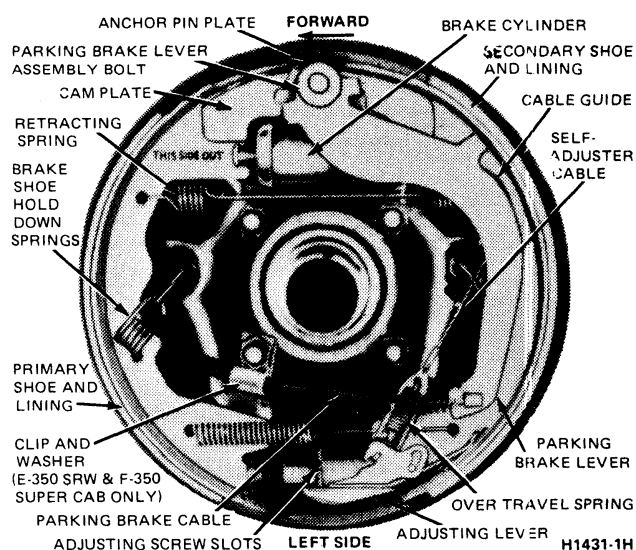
Self Adjusting Brake Assemblies—F-250, (4 x 2) and F-250 (4 x 4), F-350—F-350 (4 x 4) and E-250-E-350
